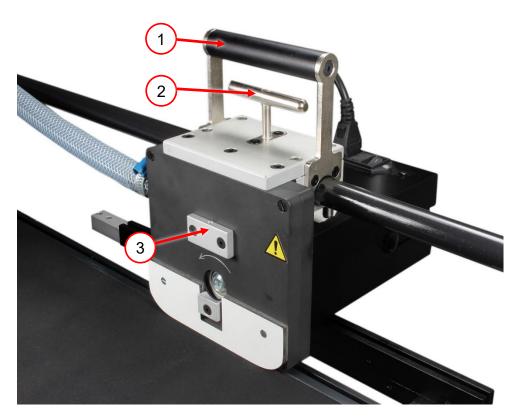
Fitting the VARGA VA 11 lifting handle and handle
